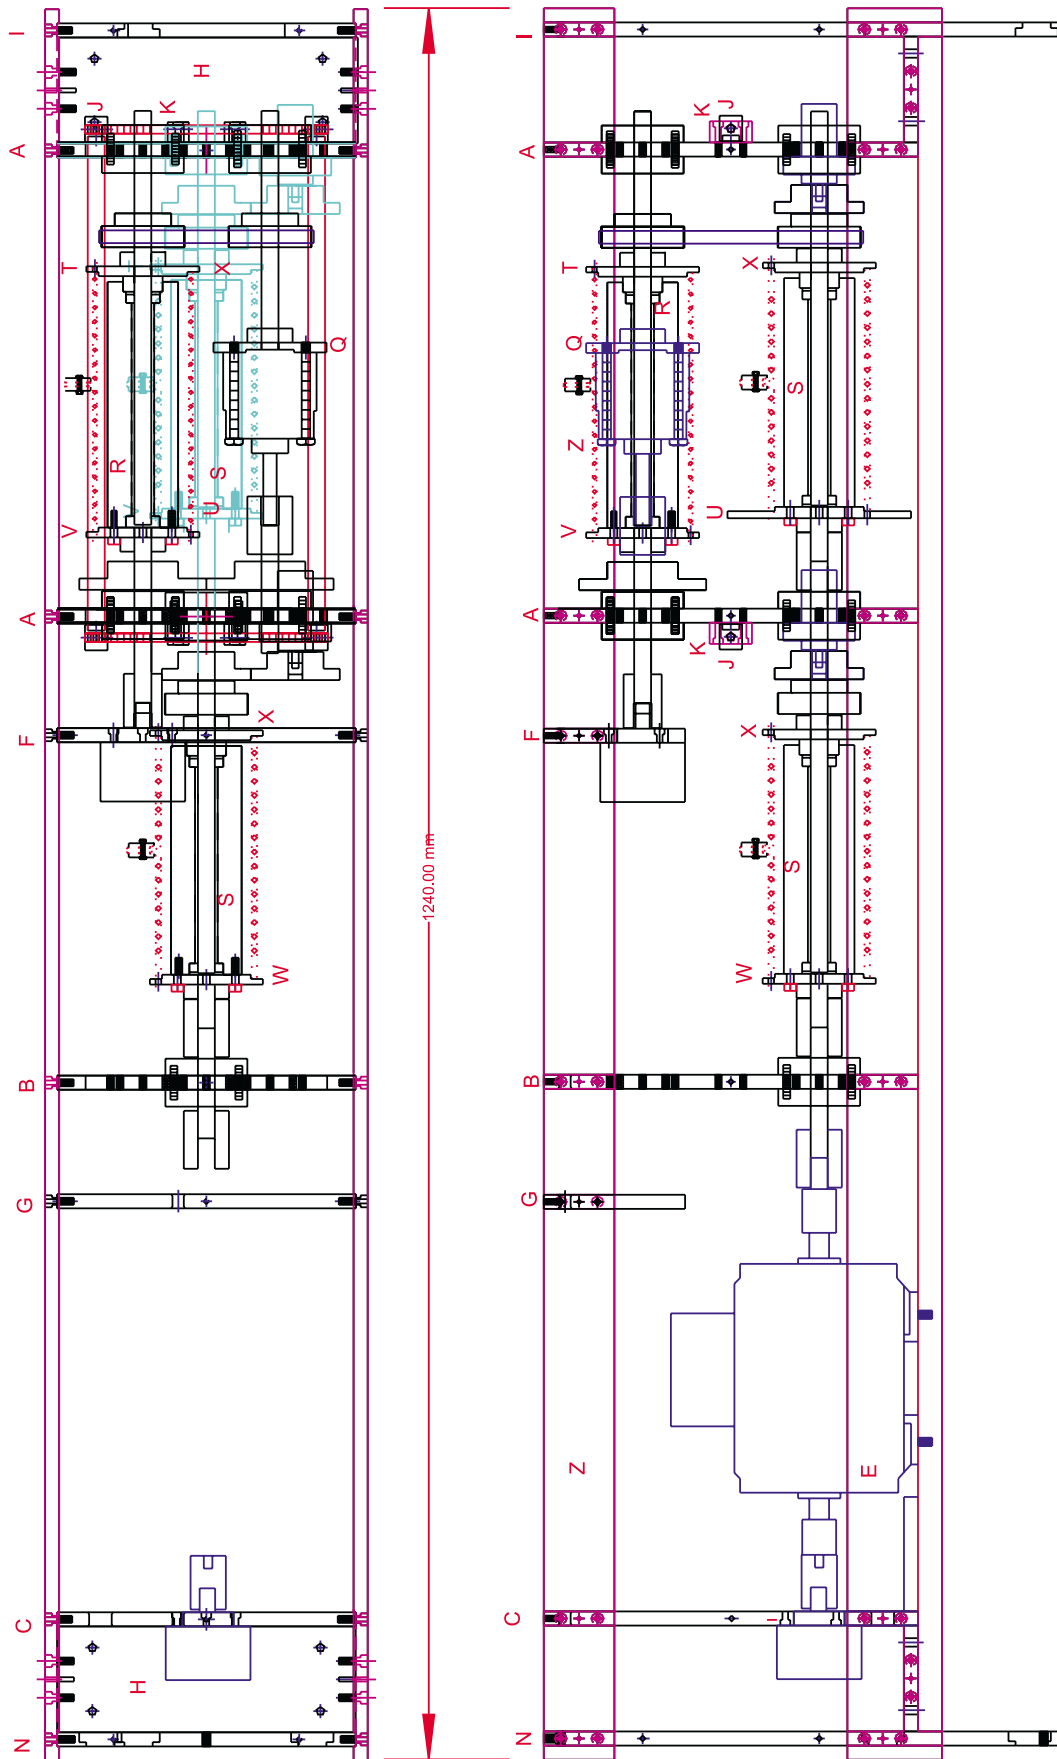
CAD designs showing top and side views of the experimental test-bed
